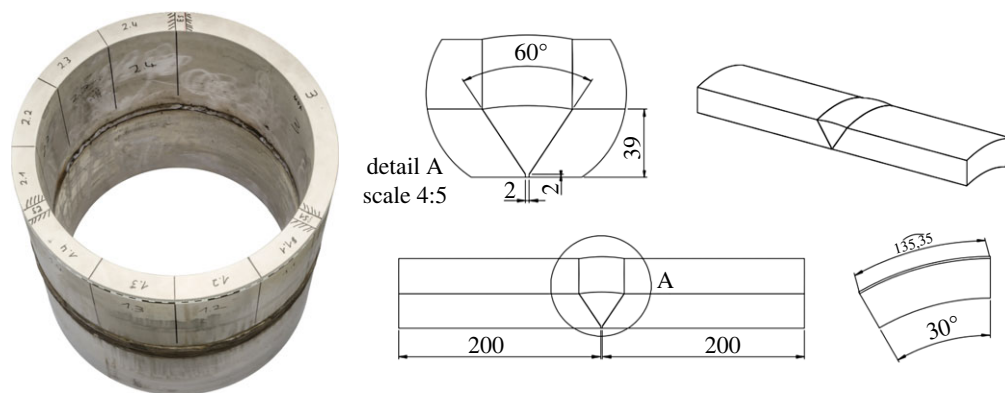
The ADVISE mock-up: a photograph and schematic drawings of a cut-out section.
